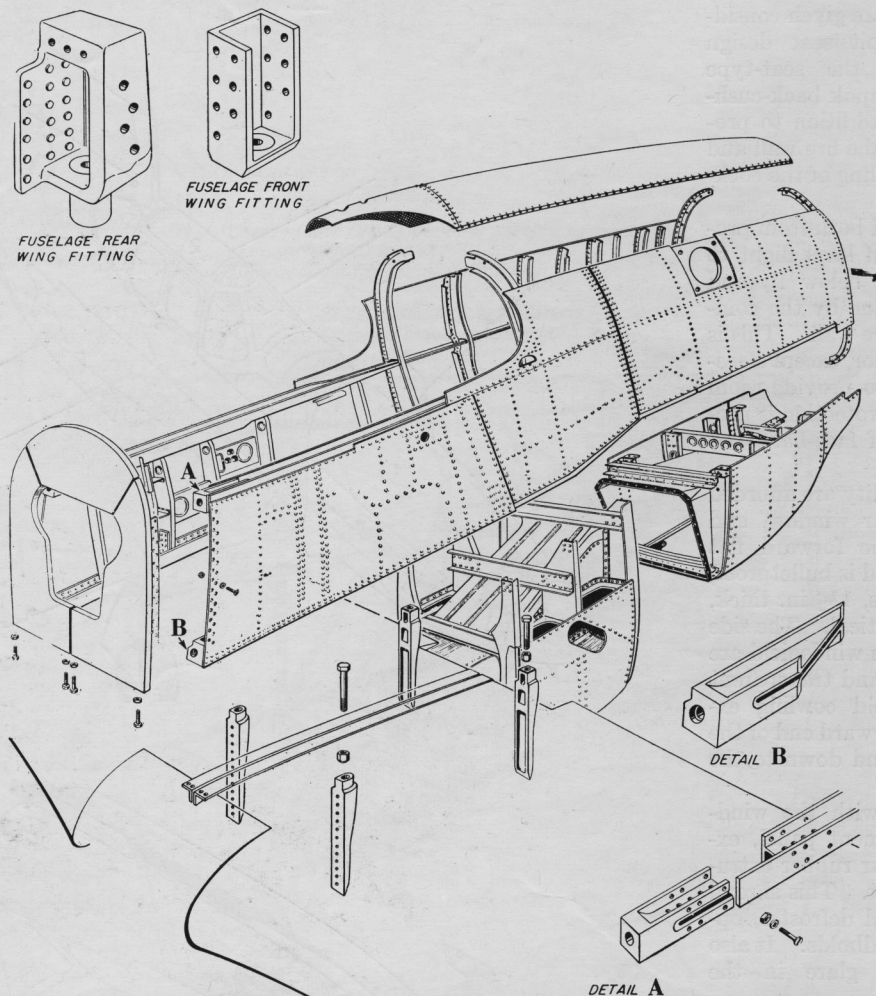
The main fuselage with fire wall, front and rear wing attachment fittings, and air scoop underneath. Details A and B are forged fittings through which pass bolts holding the engine mount and fire wall. The fuselage wing fittings are forgings carrying bolts for attachment of the wings.
